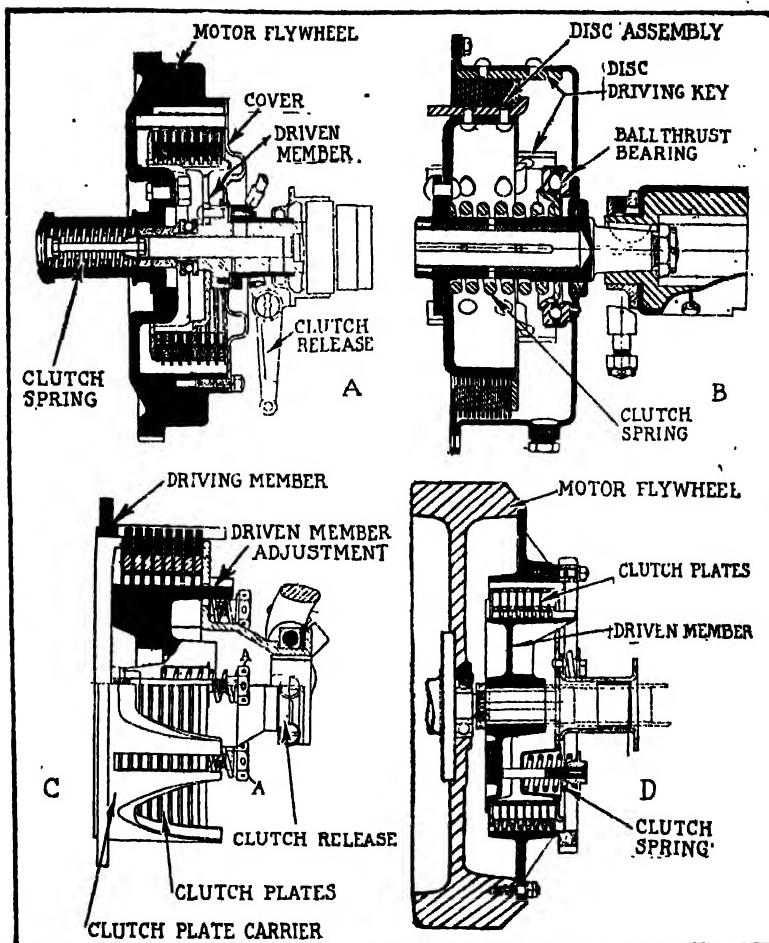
Group Showing Multiple-Plate Clutches Used on Modern Automobiles.
